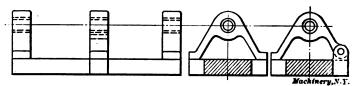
Boring Jig with Removable Bearing in the Center, Adapting it to Different Sizes of Work of Similar Character
